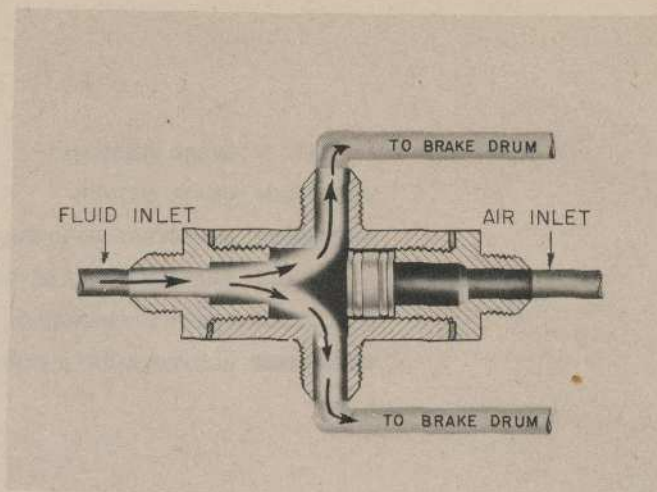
Emergency Air Brake System Shuttle Valve—Hydraulic Brakes Applied
